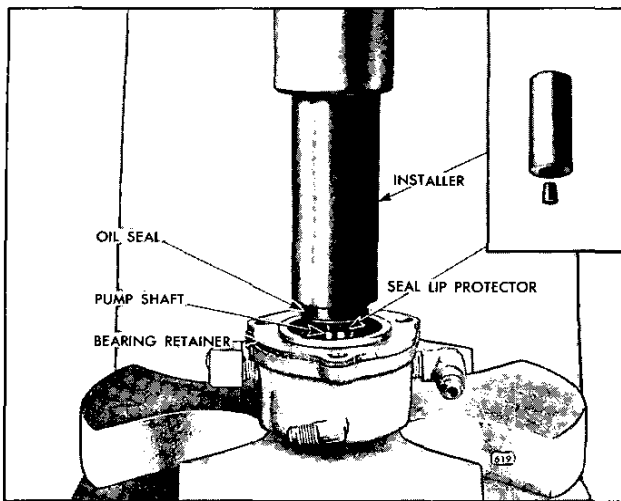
Installing Pump Shaft Oil Seal in Bearing Retainer
